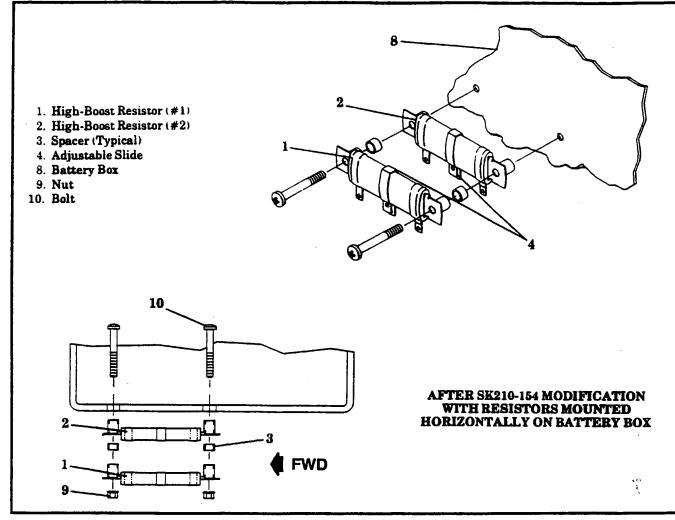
Auxiliary Fuel Pump Resistors (Sheet 2 of 2)
